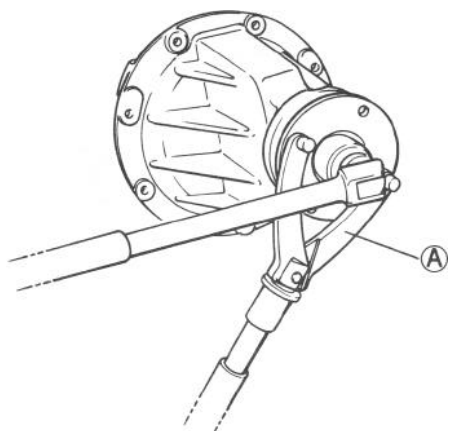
A Special tool (Rotor holder 09930-40 113)
